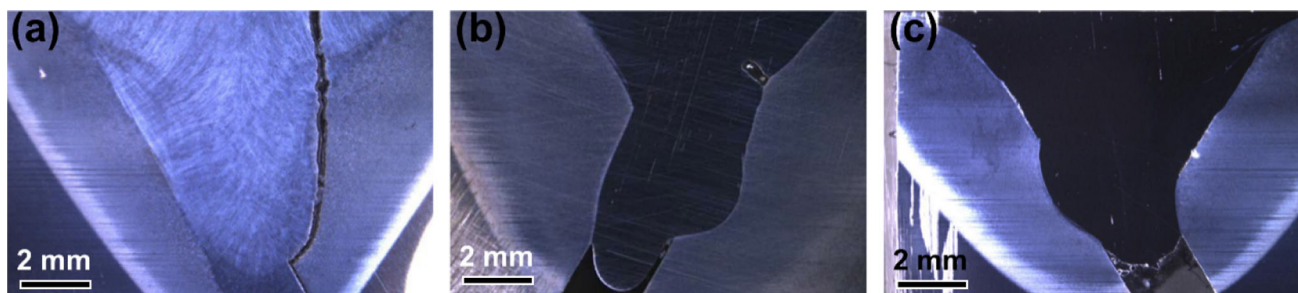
Results of crack resistance test of welds. a ER 100; b ER 307Si; c TX-80
